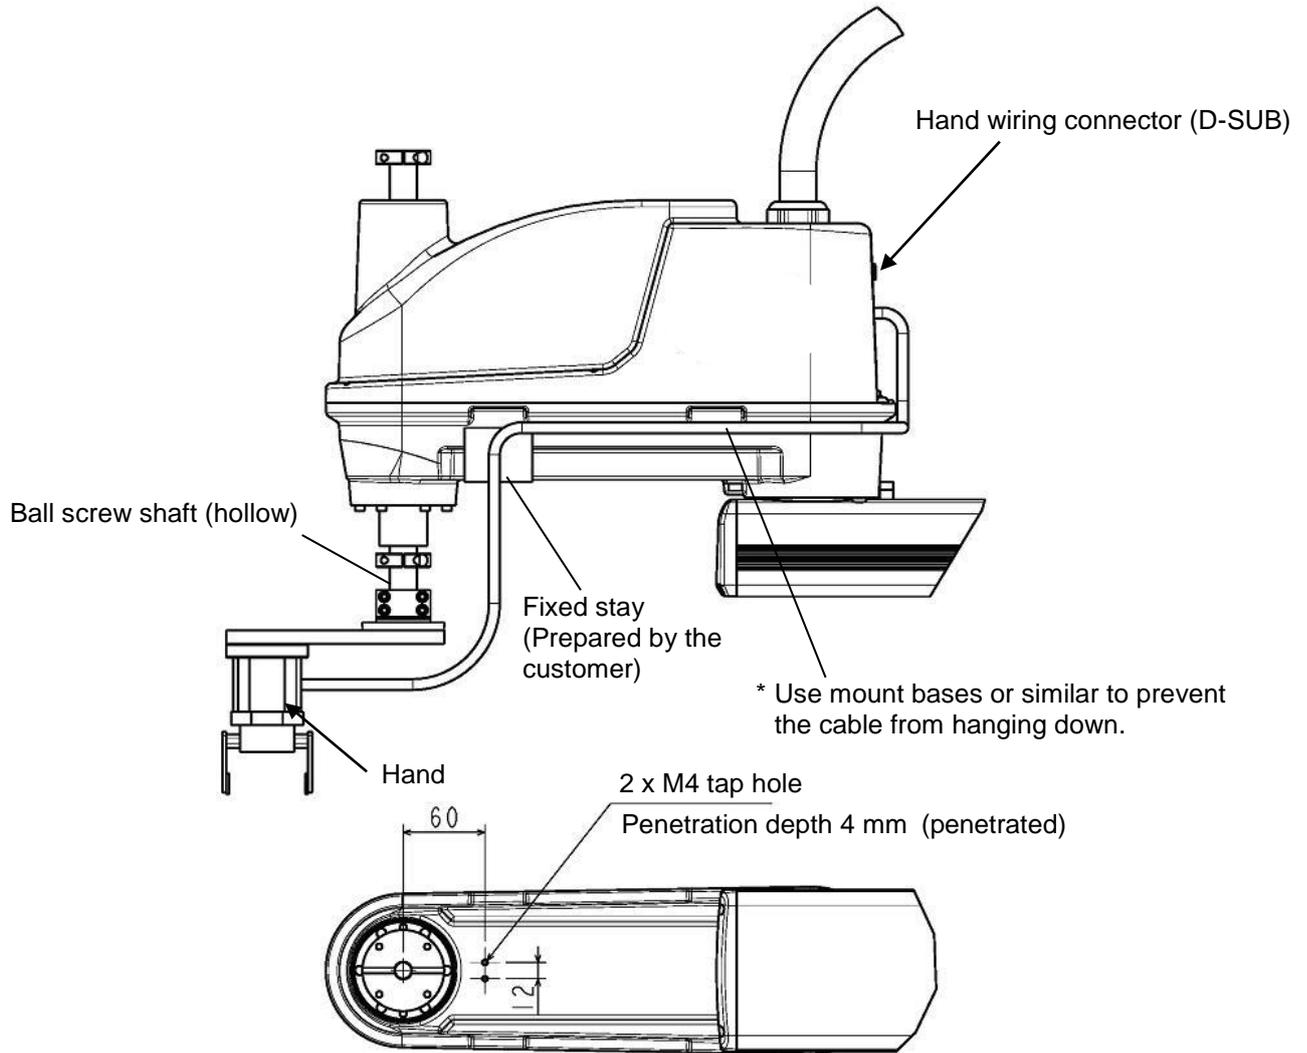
Tool cable wiring installation example using the connector (D-SUB)
